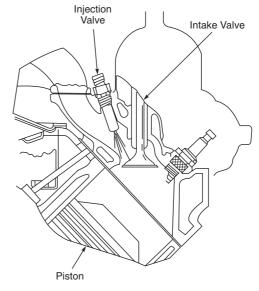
Method of Injecting Fuel into the Intake Manifold at the Intake Valve Port
